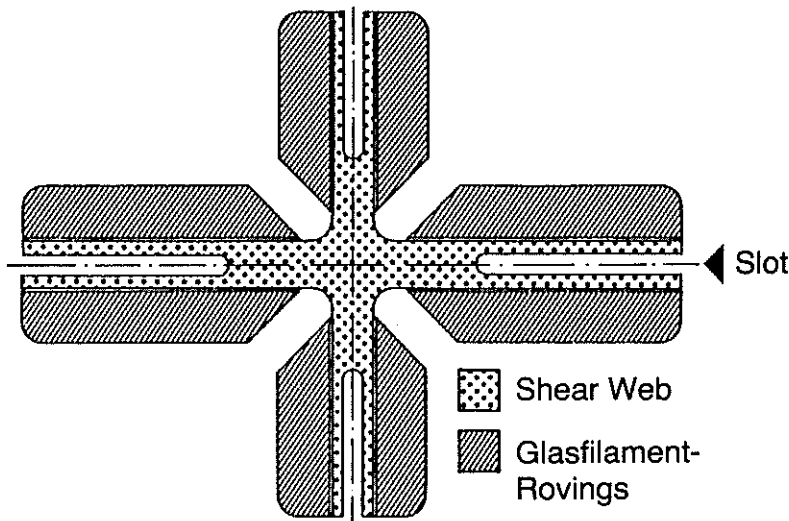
Cross-Section of Flexbeam Element Without Damper (Tail Rotor)
